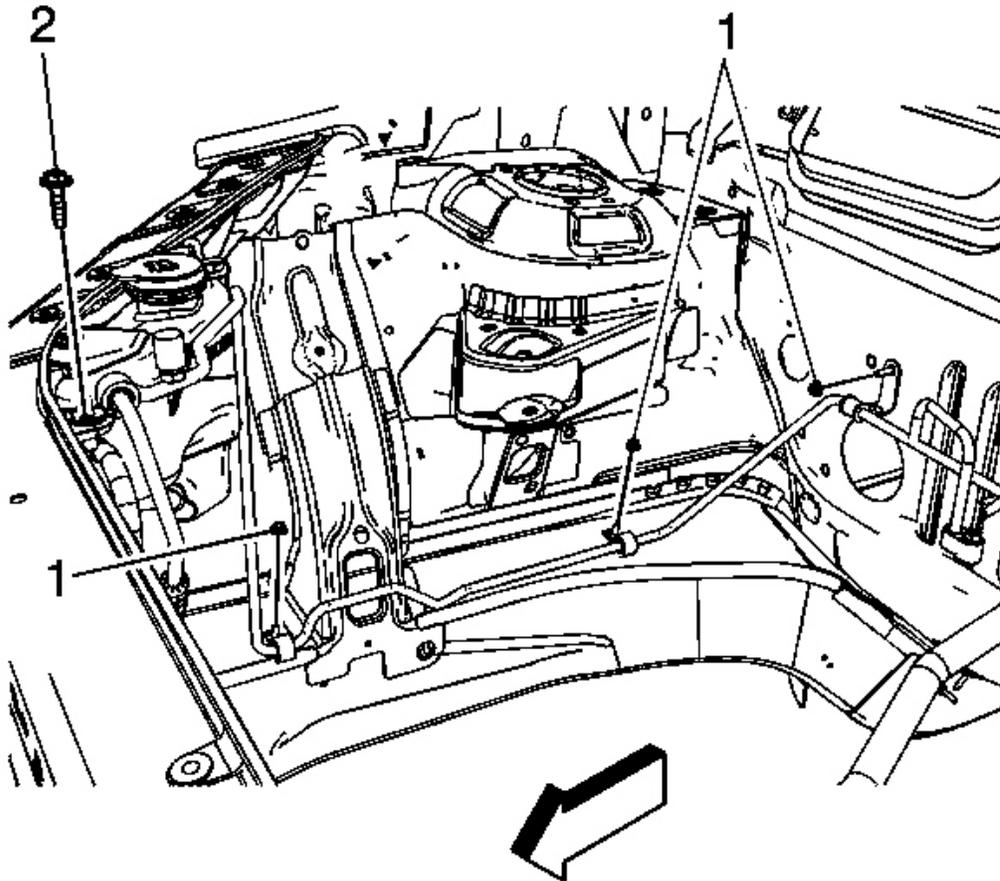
Identifying Liquid Line Clamp Nuts & Liquid Line Bracket Bolt
